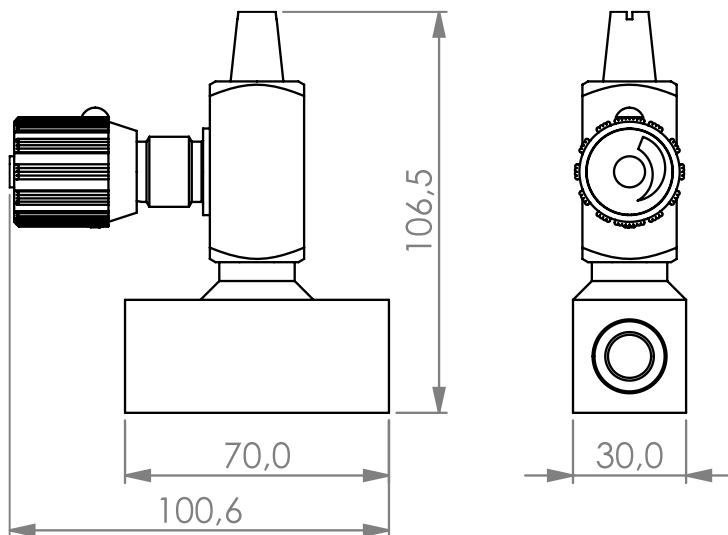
Dimensions | High-pressure measuring chamber (dimensions in mm)
